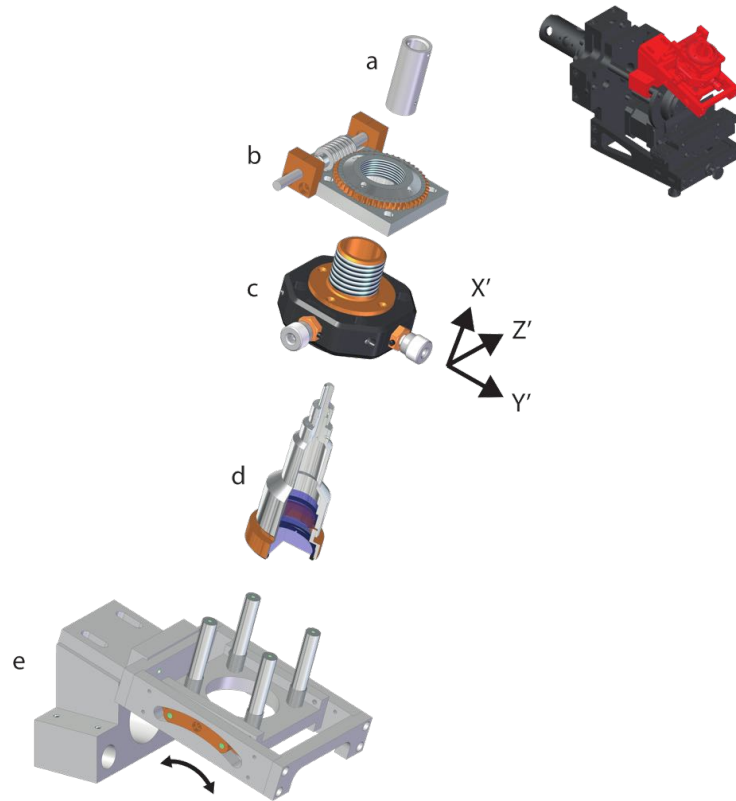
Explosion image of the laser fibre coupling unit containing a device to install the fibre (a), a plate with a spiral and gear (b), a $Y'Z'$ -translational stage with a thread on top (c), a fibre collimator (d) and a holder for the fibre coupling (e). The coordinate system $X'Y'Z'$ is rotated with respect to the coordinate system XYZ used before.
